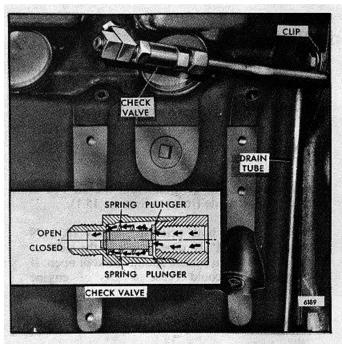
Open Design Air Box Drain Tube and Check Valve System
